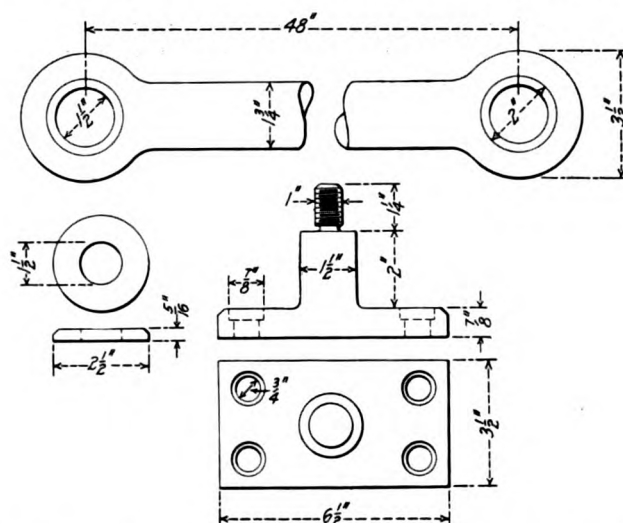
Radius Arm and Bearing for Planer Radius Attachment.
